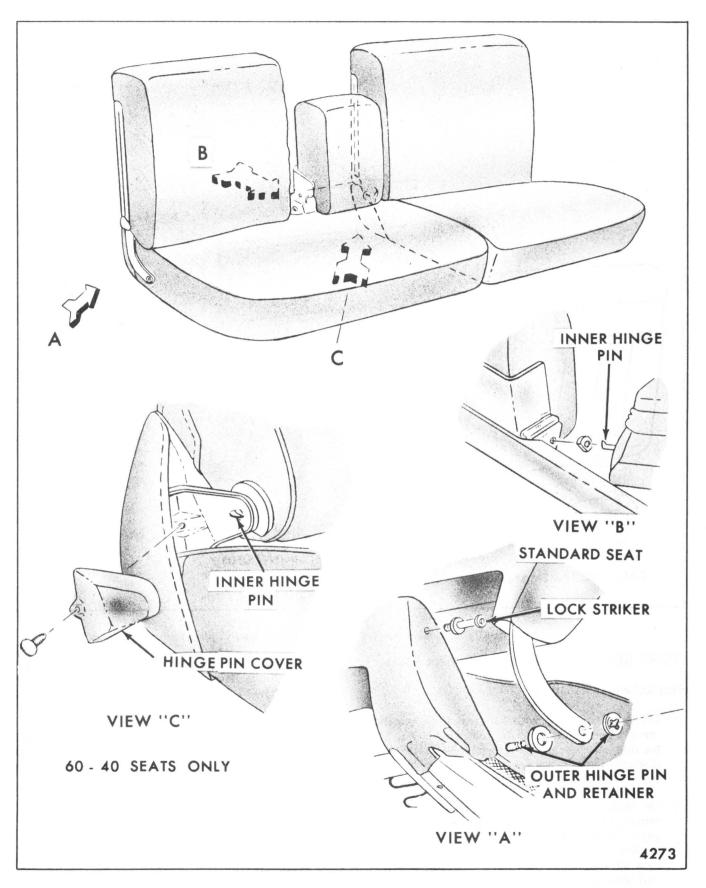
Seat Back Attachment - Two-Door Style Notch Down Center Armrest Seat and 60-40 Seat
